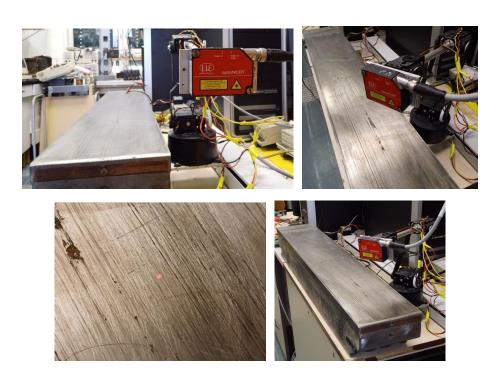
View of the measuring assembly for verification of the surface - the wear surface metallurgical materials (measurements in laboratory conditions VSB - Technical University of Ostrava)
